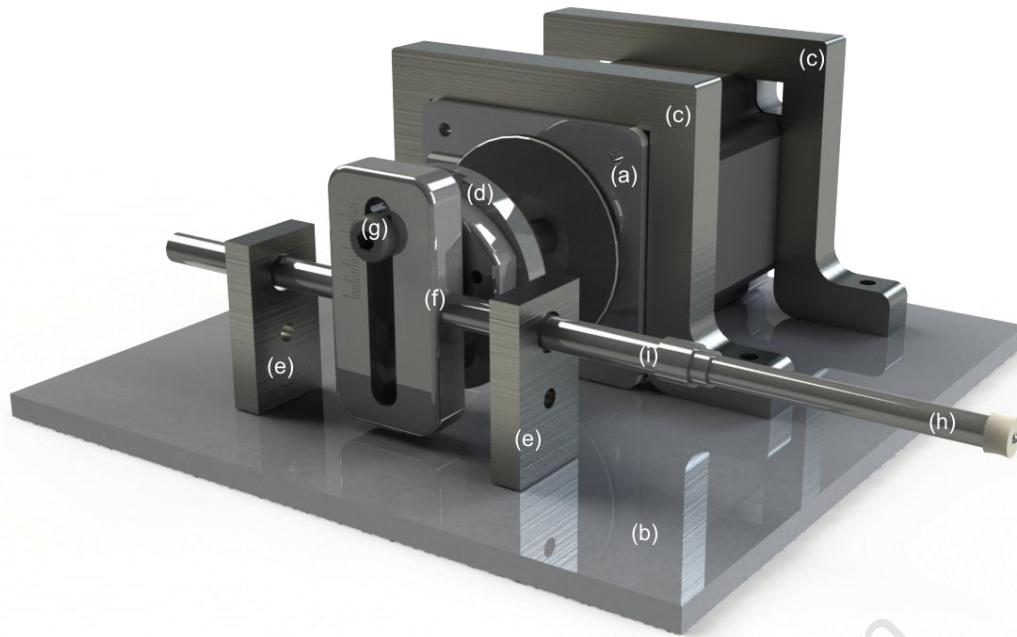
Solidworks render of the pump assembly: (a) stepper motor, (b) aluminium base plate, (c) aluminium brackets, (d) variable crank, (e) support pillars, (f) Scotch Yoke body, (g) crank pin, (h) piston plunger, (i) Scotch Yoke pushrod
